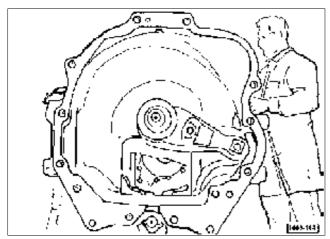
Locate the thrust bearing control mechanism in the intermediate housing, complete with operating lever.
